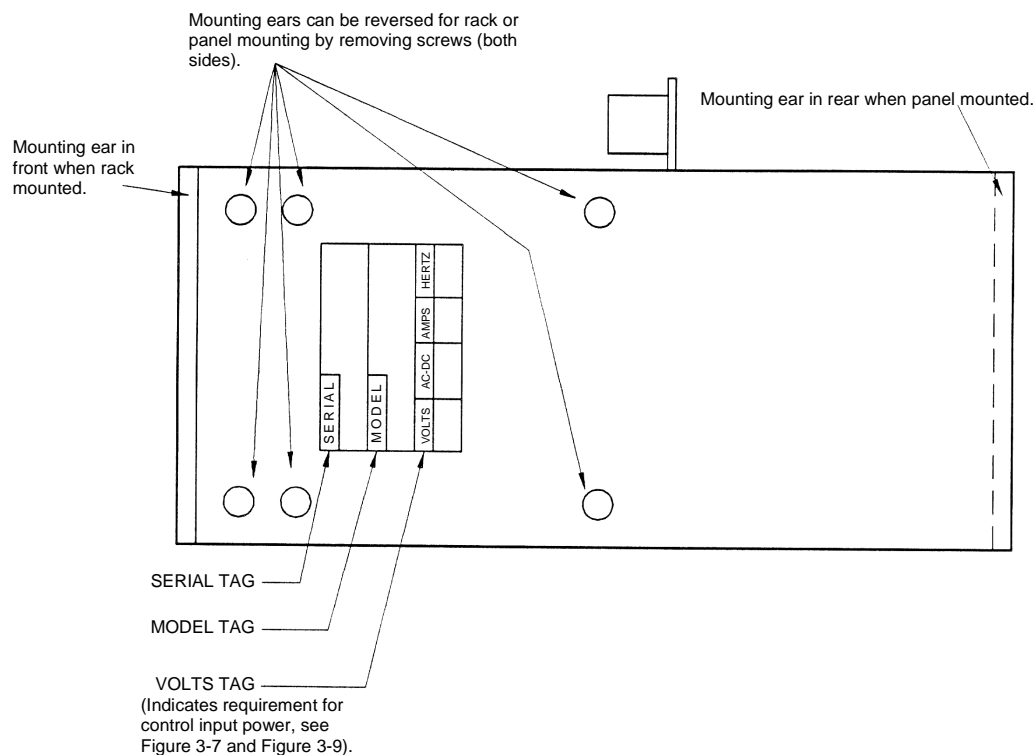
Side View of DSR/DSRF Mounting Rack
